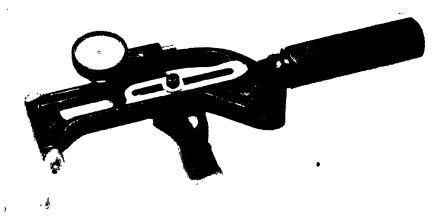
ADJUSTABLE GAUGE FOR CHECKING DIAMETER OF BORL WITHOUT REMOVING HONE (George H. Alexander Machinery, Ltd.)
